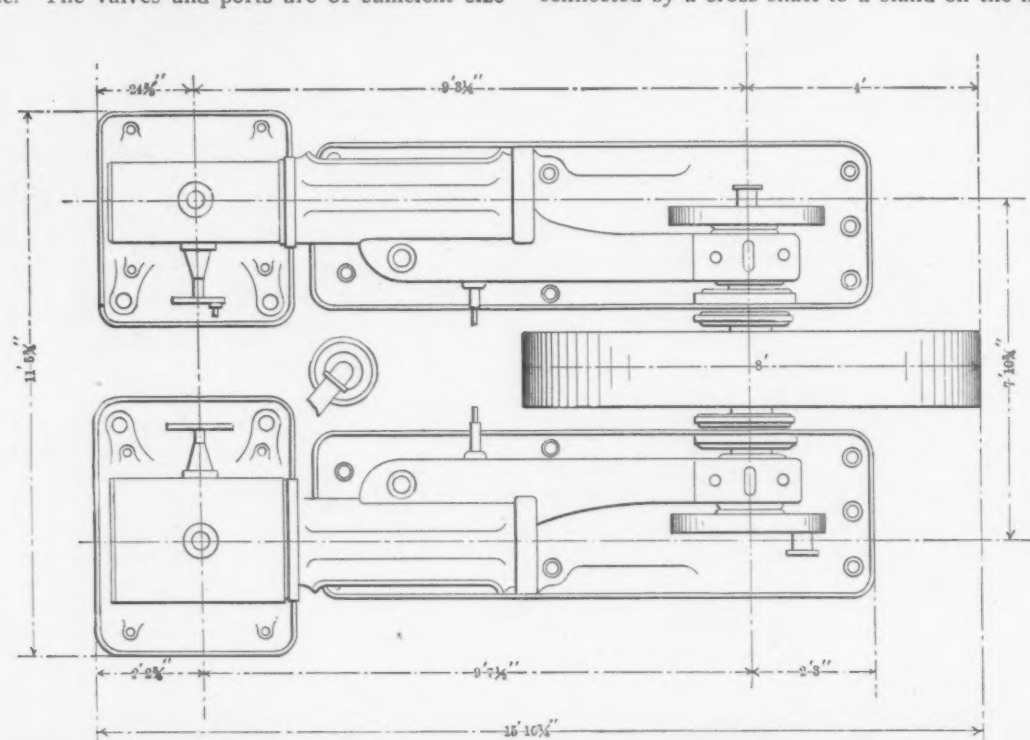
Plan View of the Engine, Giving Principal Dimensions.
